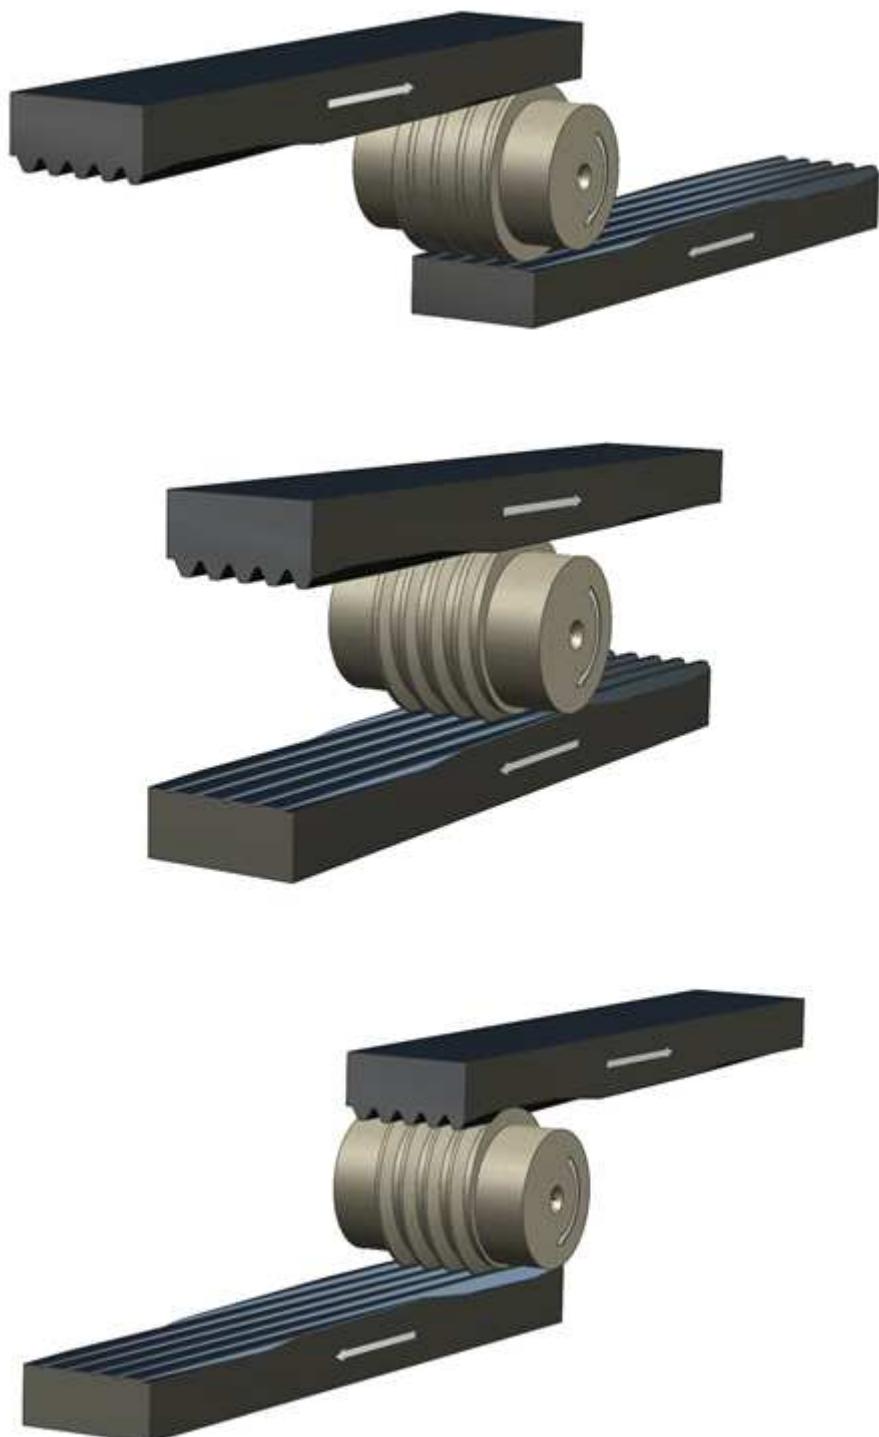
Forming Sequence in RotoFlow Thread Rolling
